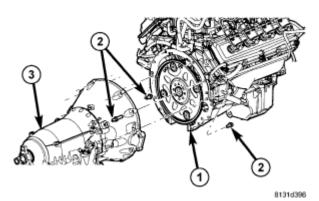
Engine, Bolts & Transmission Courtesy of CHRYSLER LLC
